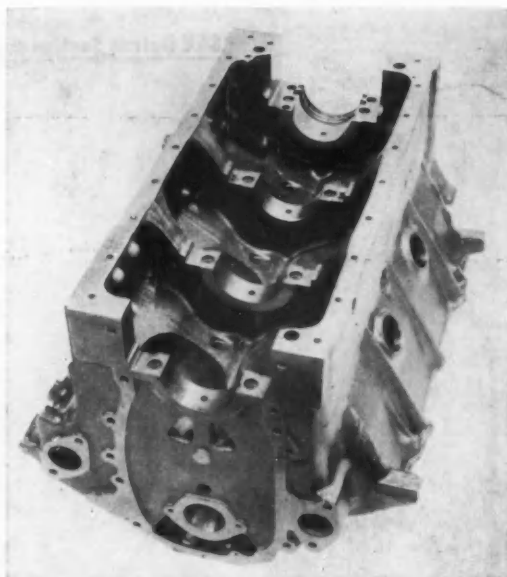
Inverted view of the cylinder block shows dropping of block rails 3 in. below crankcase centerline to increase rigidity of block and to provide greater depth at point of flywheel housing attachment.
